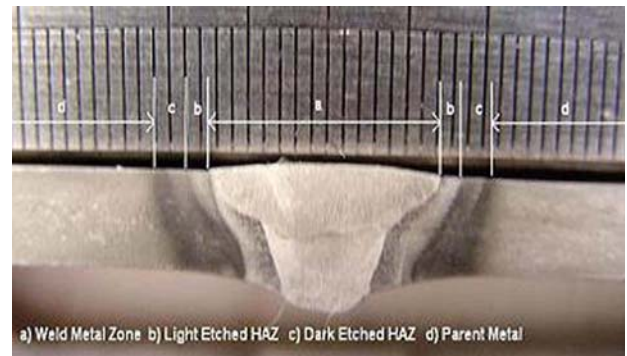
Macrostructures produced in post-weld aged specimen
